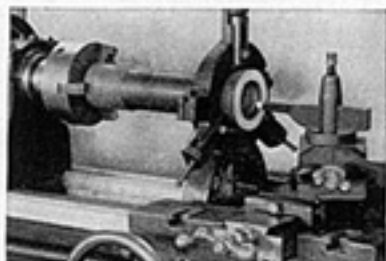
Threading the end of a pipe on the inside with a center rest.
